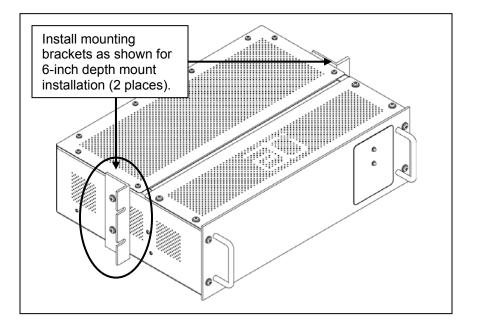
MOUNTING BRACKETS IN 6-INCH DEPTH POSITION.
